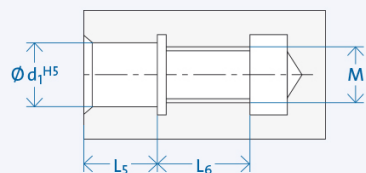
FOR GRINDING WHEELS ON THREADED PIN (PL)\
